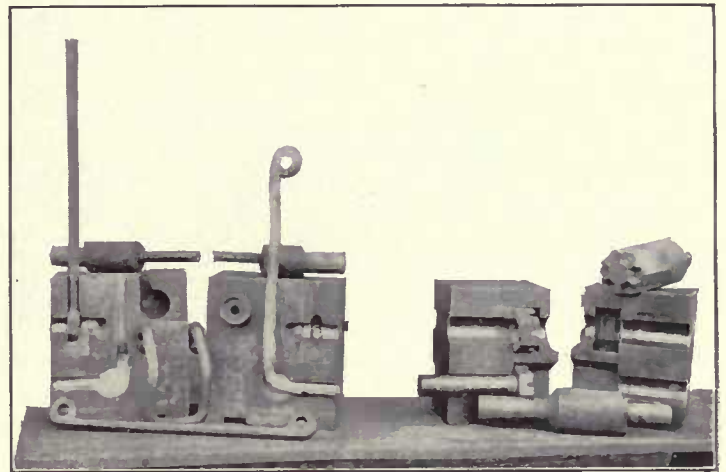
Dies for Upsetting and Punching Brake Hanger Ends and for Forging Castle Nuts.
